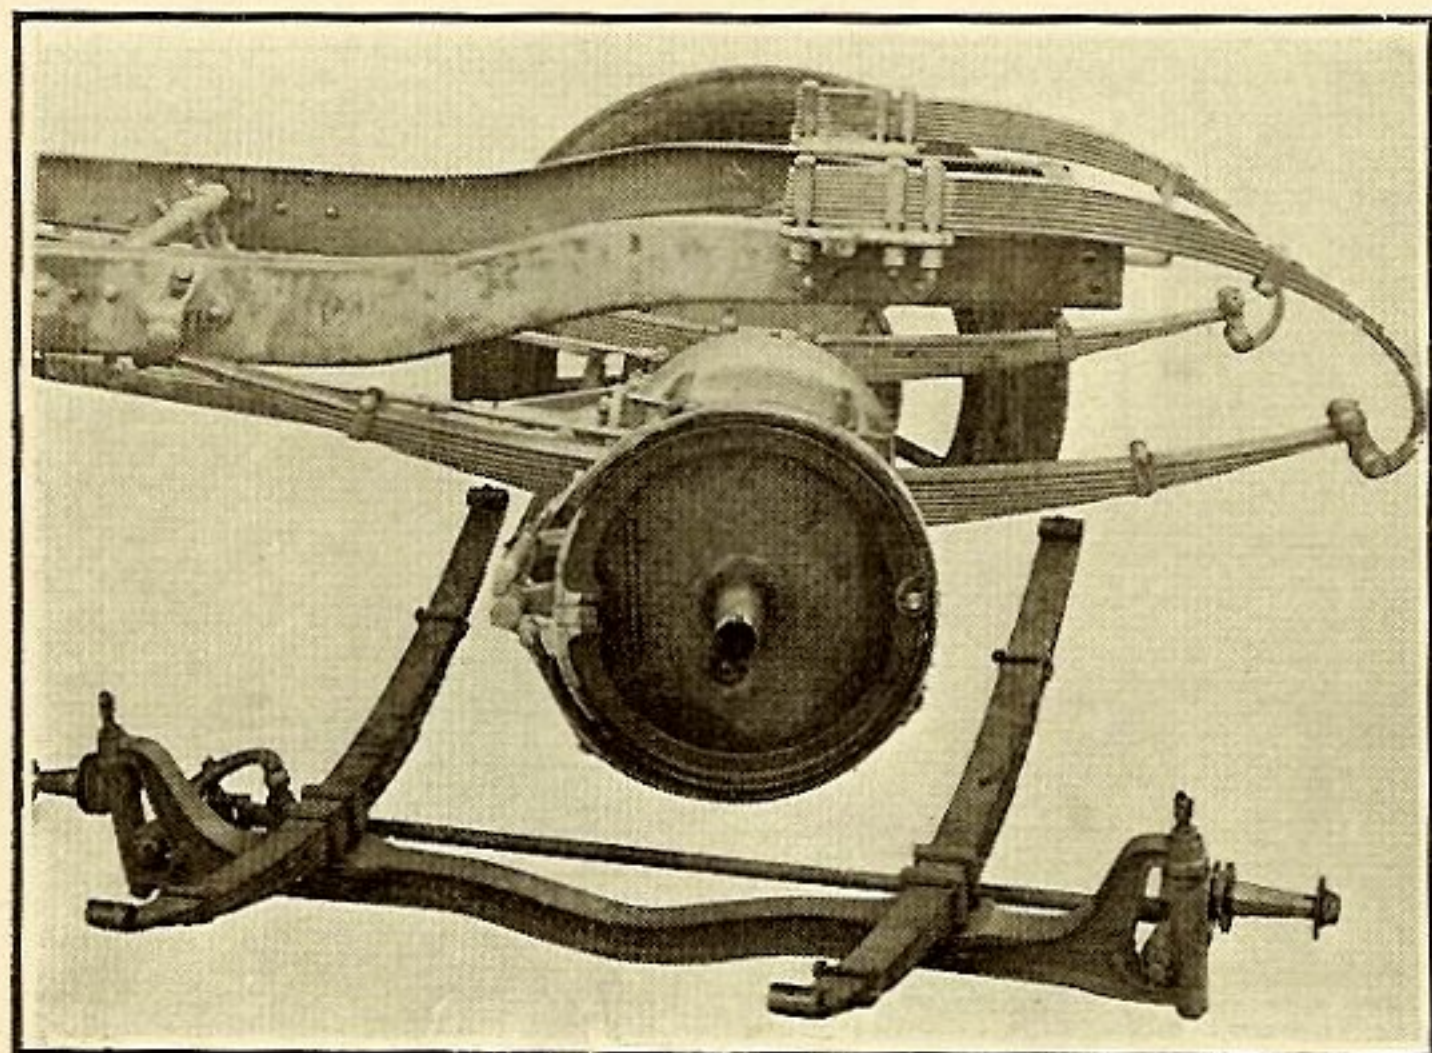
Showing suspension of National front and rear axle, as well as brake construction and differential in perspective
